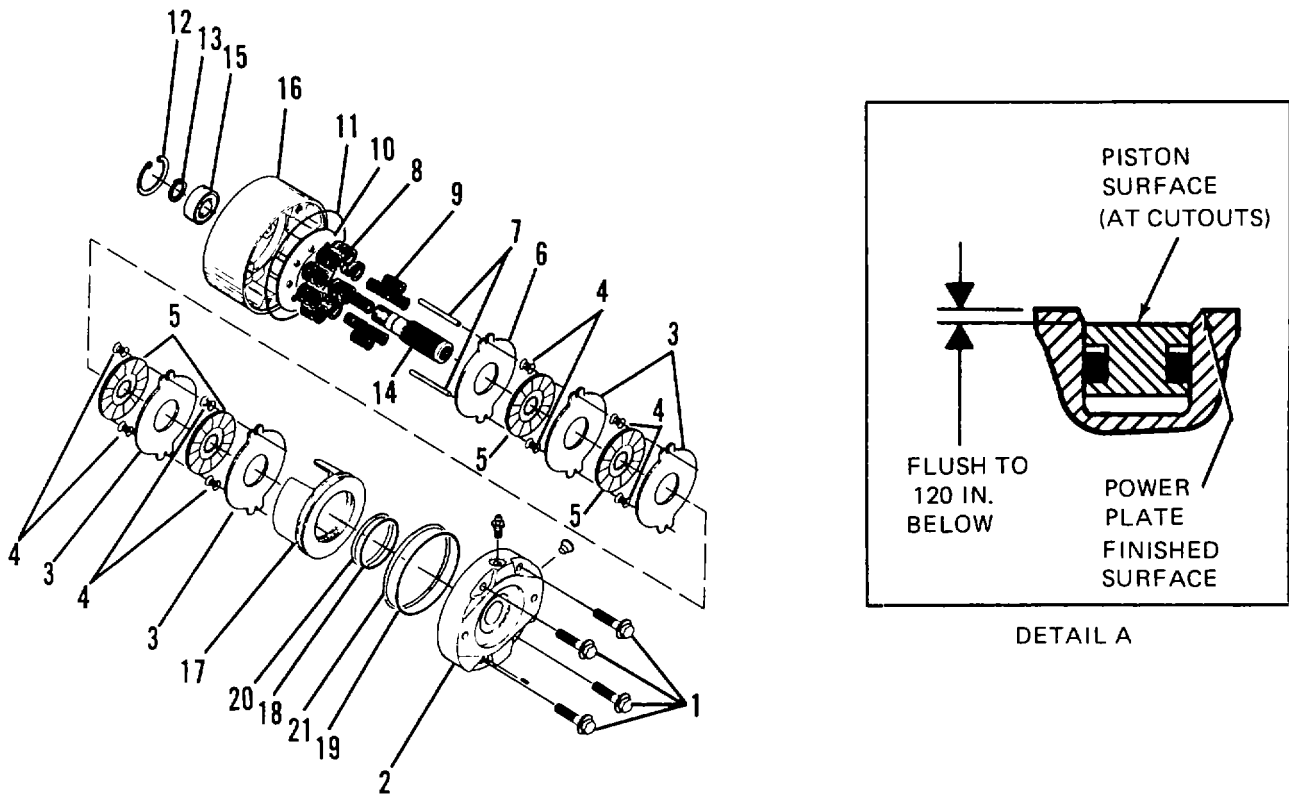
Hydraulic Brake Assembly (Sheet 2 of 2).
